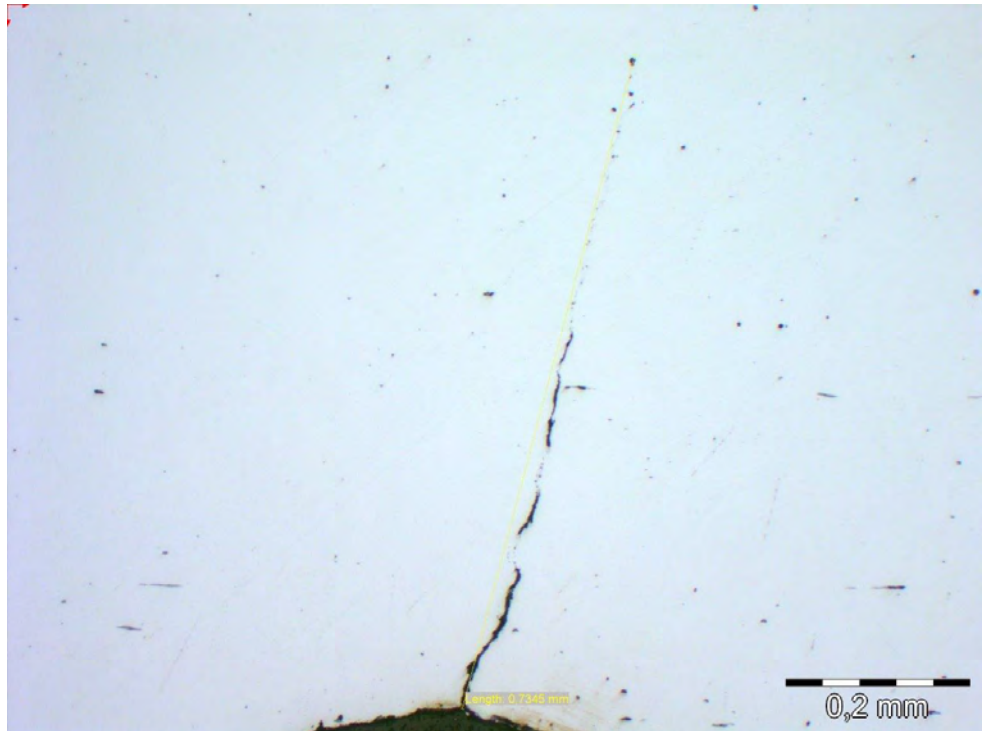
Cut four in crack at segment C, second ridge on barrel no. 14389
